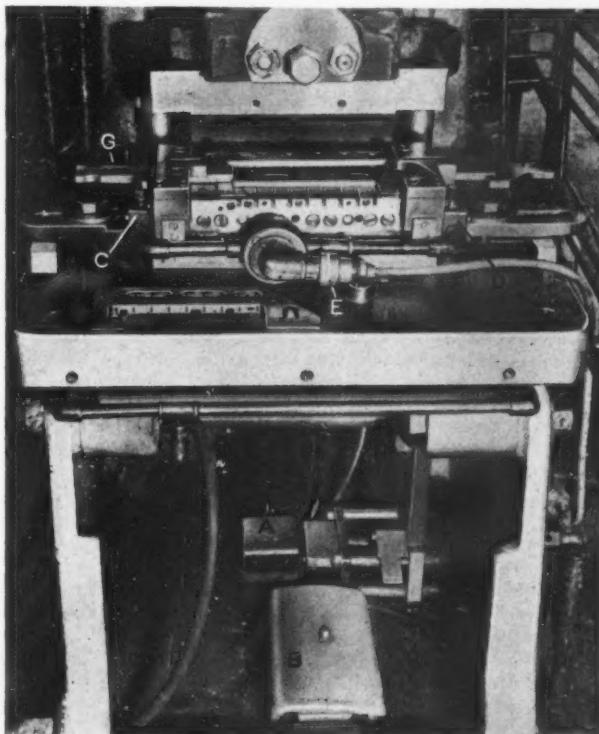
The Set-up for Piercing Slots for Key Stems in Frame Plates for Sumlock Calculating Machines. Sliding Blades are Fitted at Either Side of the Tool, and Unless the Workpiece has been Loaded Correctly, these Blades cannot be Moved Inwards, and the Press Cannot be Operated
